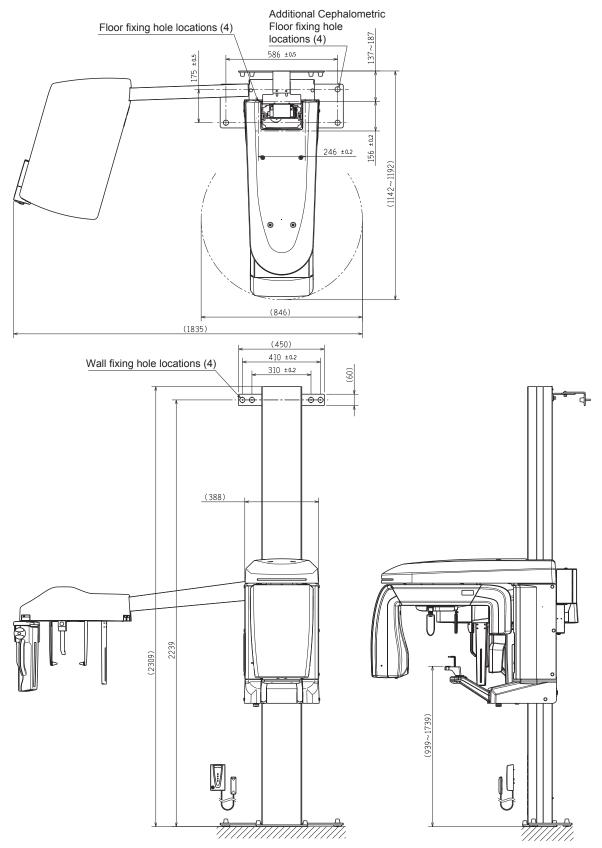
Fixing hole location measurements (Standing position wall-mount long type: 3D Cephalometric type)
